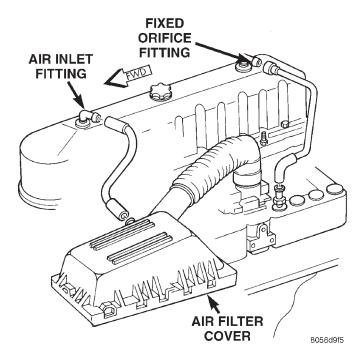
Install Orifice Tool 4.0L 6–Cylinder Engine
